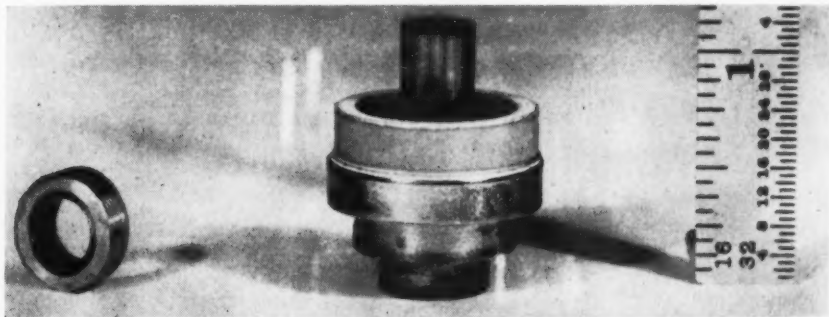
Example of operation in which electrical discharge machining was most advantageous.
